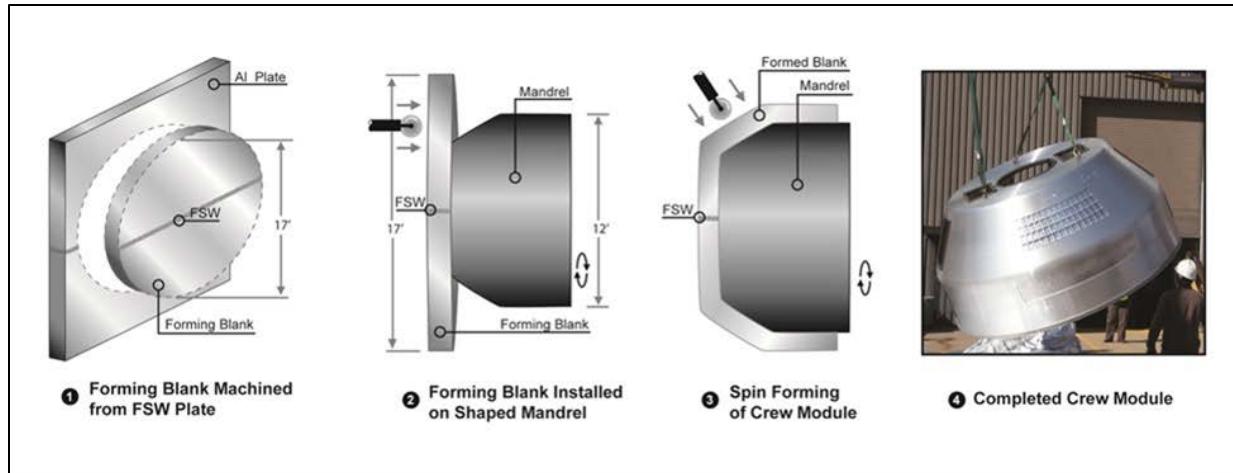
Schematic of Spin Forming a Single-Piece MPCV Forward Pressure Vessel Bulkhead.
